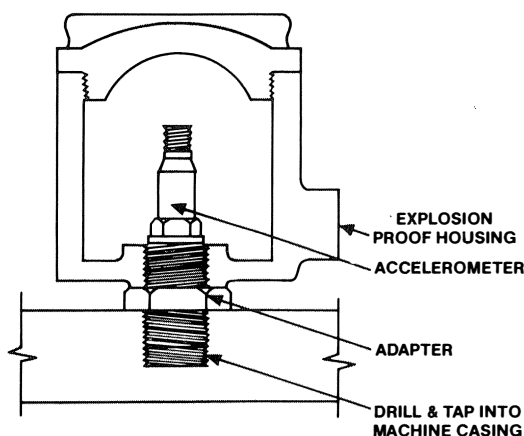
Recommended Method of Mounting an Accelerometer Inside an Explosion Proof Housing.
